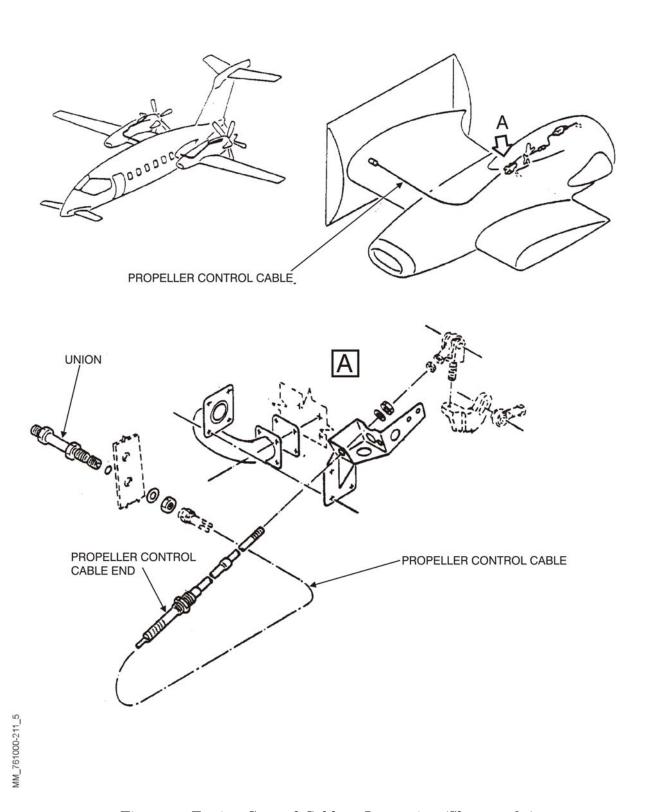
Engine Control Cables - Inspection (Sheet 5 of 5)
